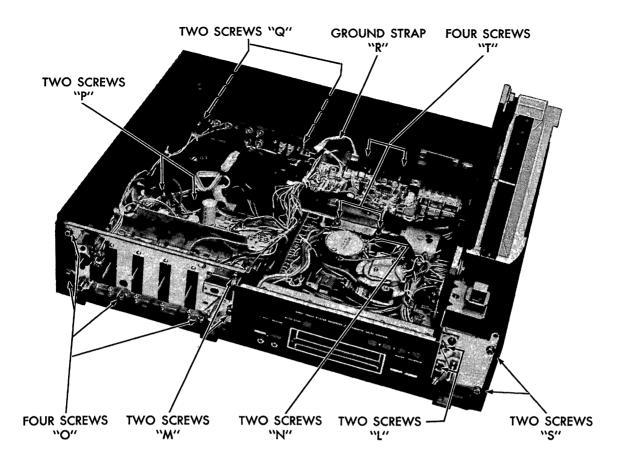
CHASSIS AND TAPE UNIT MOUNTING SCREWS
